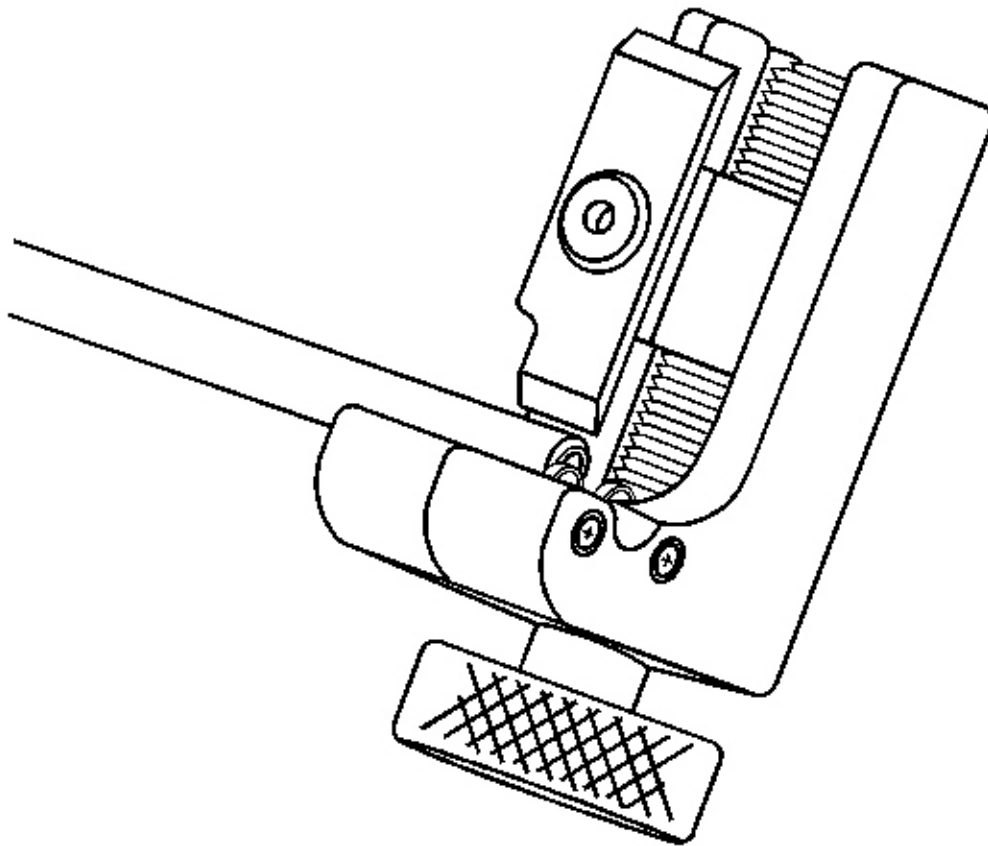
Stripping Nylon Coating From Brake Pipe Ends
